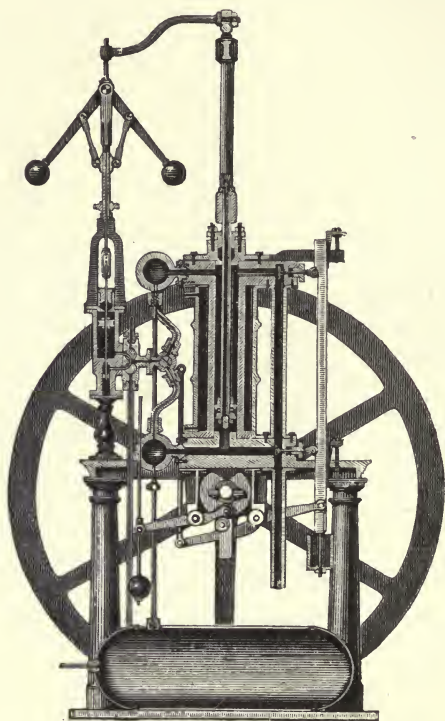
Wright's Gas-exploding Engine, 1833.
